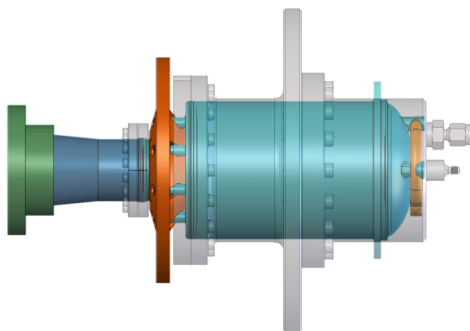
SRSC hermetic prototype design overlaid on the bolted flange prototype design.
